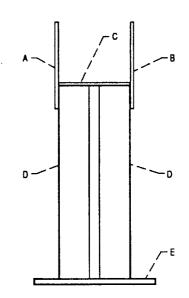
PARTS IDENTIFICATION FOR THE REFLECTOR FEED MOUNT.
